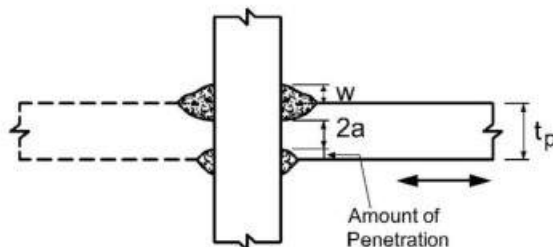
Loaded Discontinuous Plate Element Connected by a Pair of Partial Joint Penetration Groove Welds
